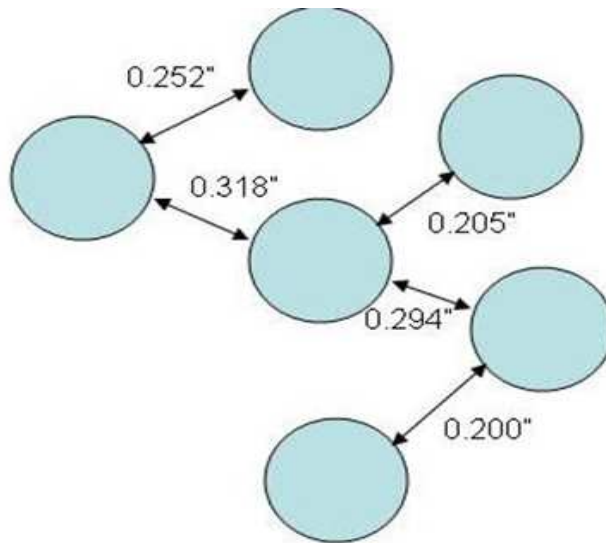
Inventor™ drawing of the silicone septum placed inside the entering hydrogen gas enclosure.
